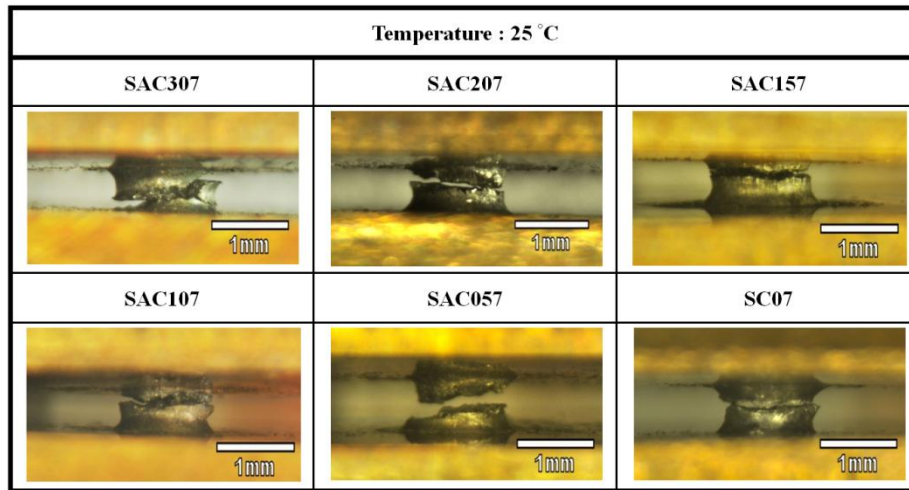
Different fracture modes of SAC solders at 25 °C
